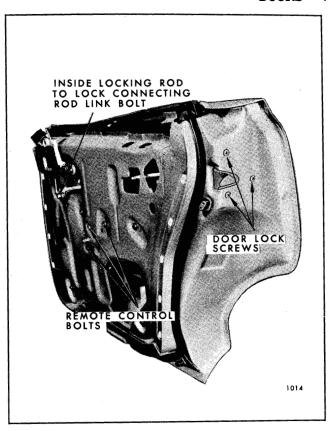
Rear Door Lock Removal – Hardtop Style Shown, Closed Style Similar
